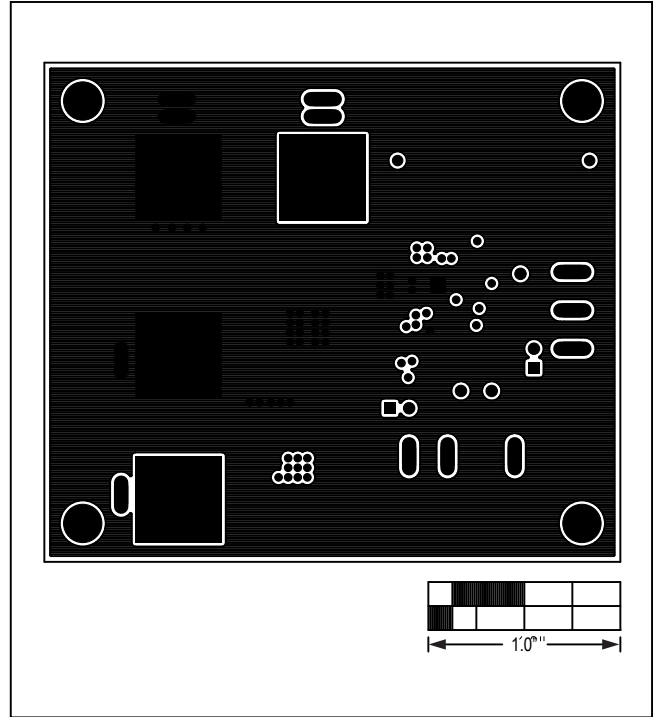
MAX16962R EV Kit PCB Layout—Solder Side
